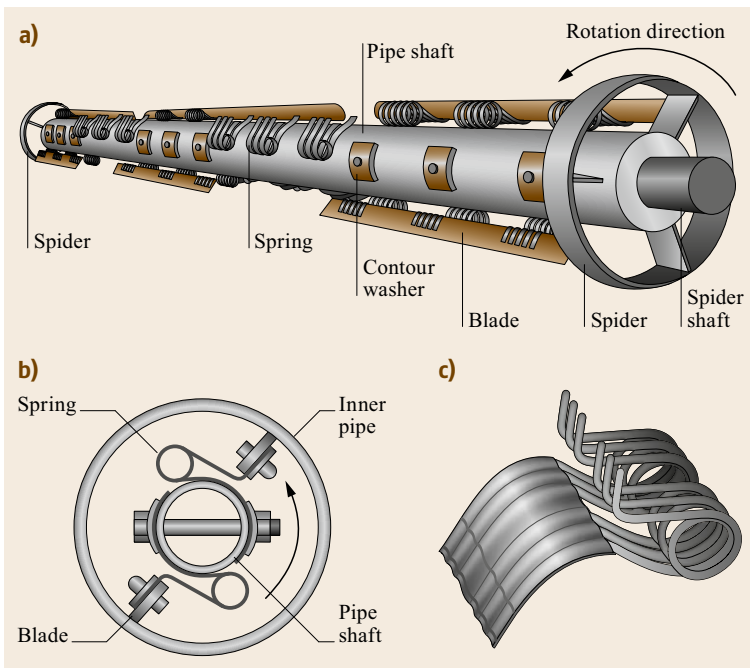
,b Armstrong SSE internals – design views. Pipe shaft with leaf spring assembly and scraper blades (a), Cross-section of shaft showing leaf spring and scraper assembly (b), leaf spring (c) (courtesy of Armstrong)
